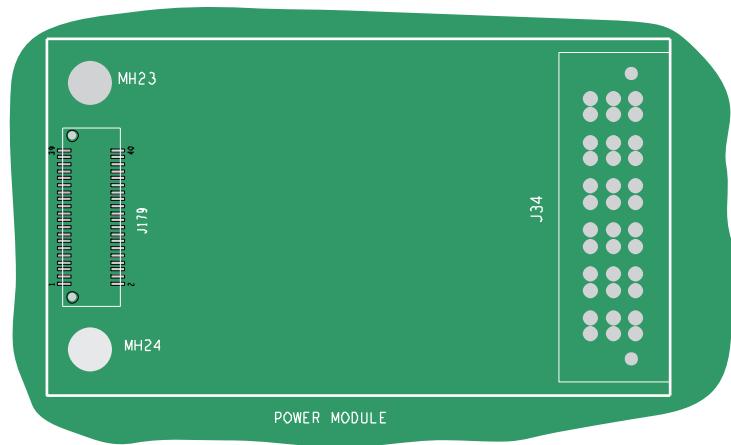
Mounting Location, GTX Transceiver Power Module
